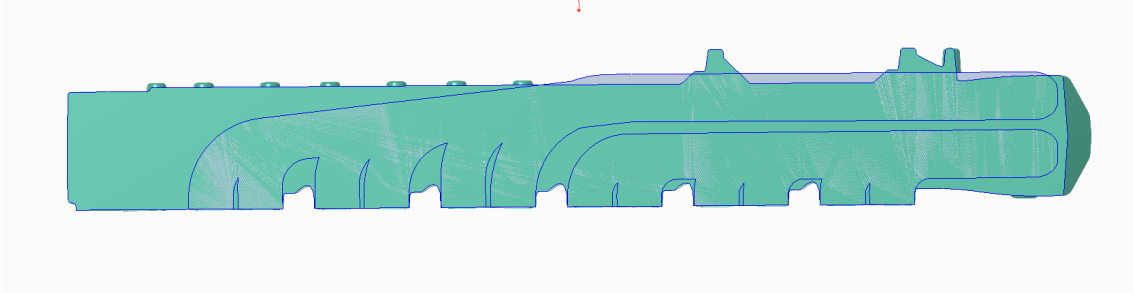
Dual Piped Exhaust Manifold placed inside old cooling chamber
